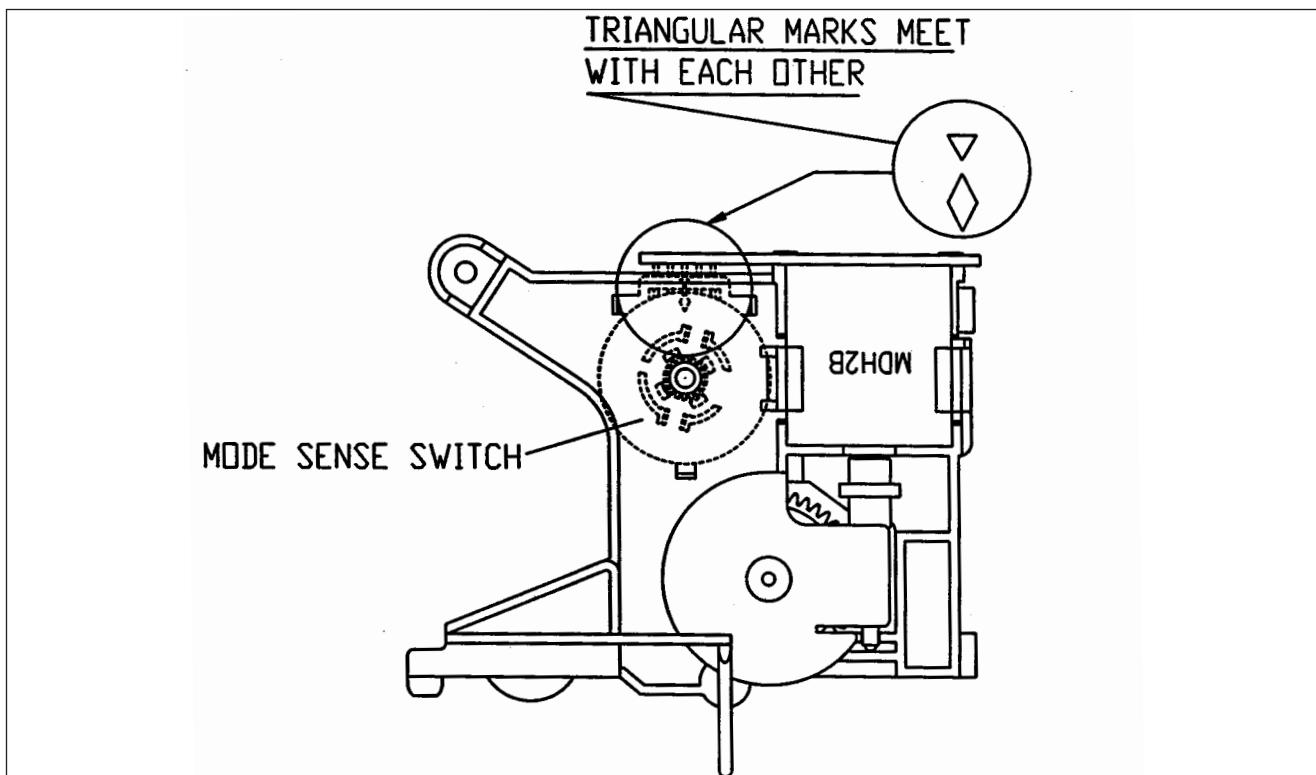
Mechanical checks/Mode Sense S/W Alignment
